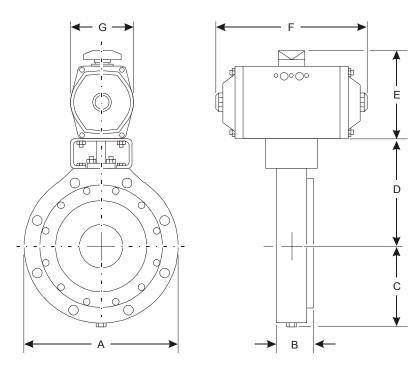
Overall Dimensions, in. (mm) for Industrial-Grade V-9000 Series High Pressure Pneumatic Actuated Two-Way VF Series High-Pressure, High-Temperature Butterfly Valves (Refer to Tables 17 and 18.)
